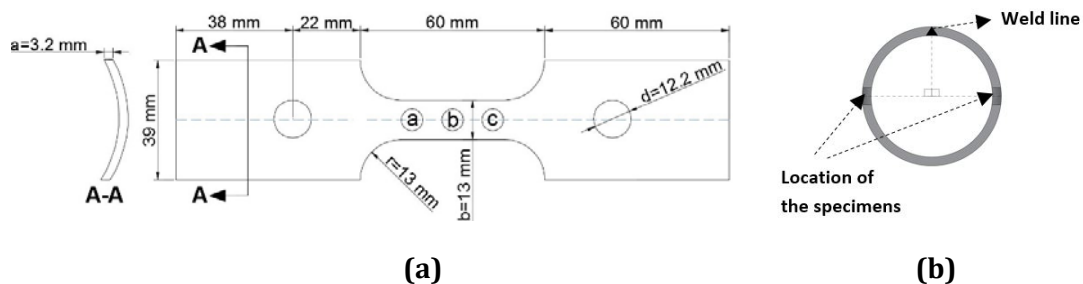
a) Geometry and b) location of test specimens sectioned from the steel tubes
